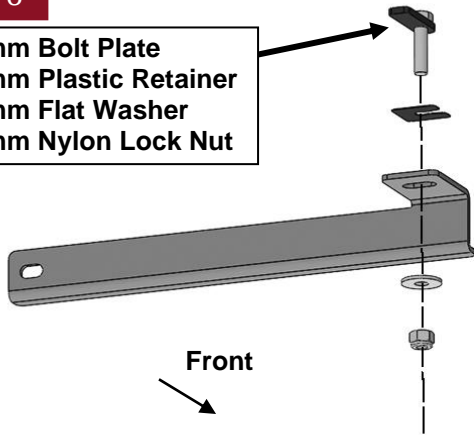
Insert (1) 10mm Bolt Plate into the inner hole. Thread (1) 10mm Plastic Retainer onto the Bolt Plate to hold it in place
